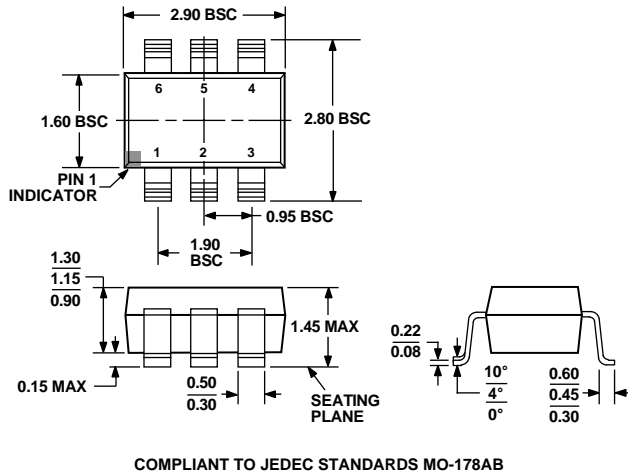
6-Lead Small Outline Transistor Package [SOT-23] (RJ-6)
